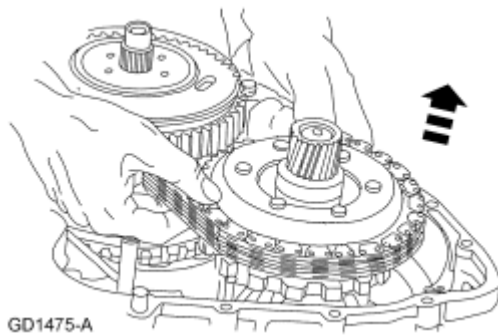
Chain Drive, Reverse/Overdrive Ring Gear & Driven Sprocket Assembly
